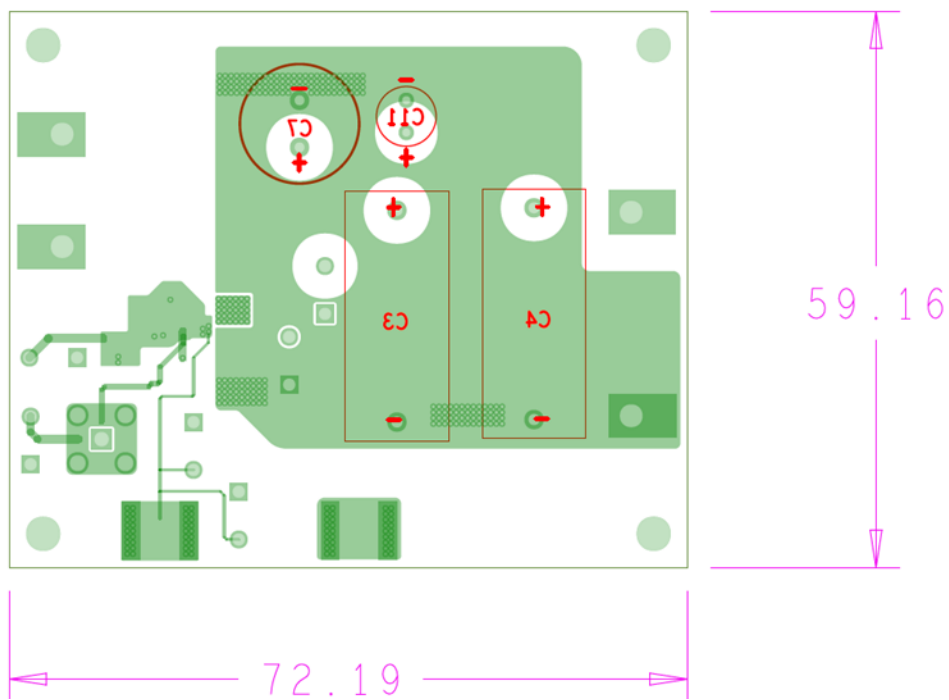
EVB PCB Layout of the Bottom Layer.
